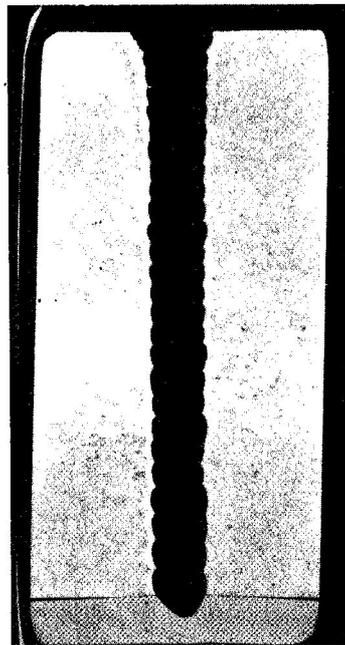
Narrow-Gap MIG Weld in 2219 Allow
